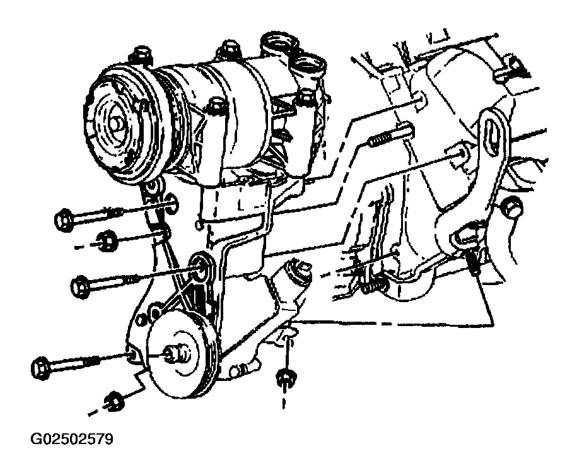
Installing Power Steering Pump Mounting Bracket Courtesy of GENERAL MOTORS CORP.
